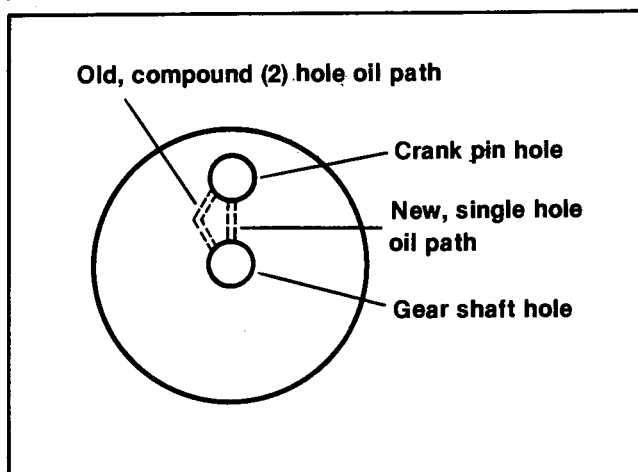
Flywheel Gear Side Oiling Hole (1000cc/1340cc)
